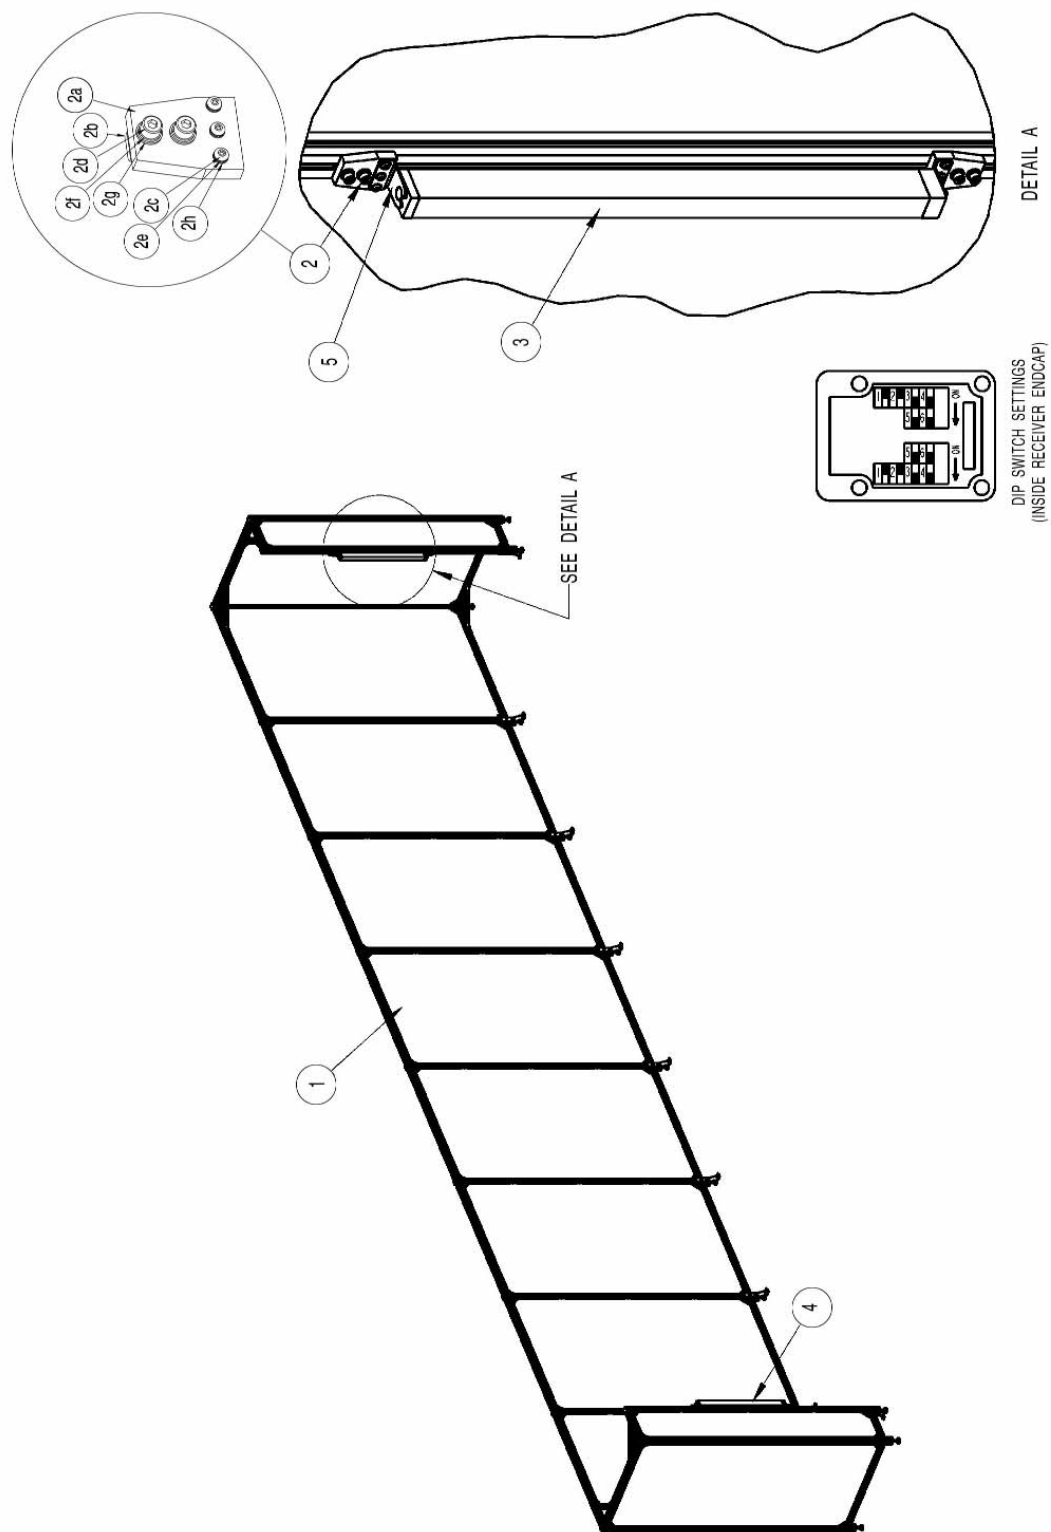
N – 2 METER EXTRUSION GUARD ASSEMBLY - CE
